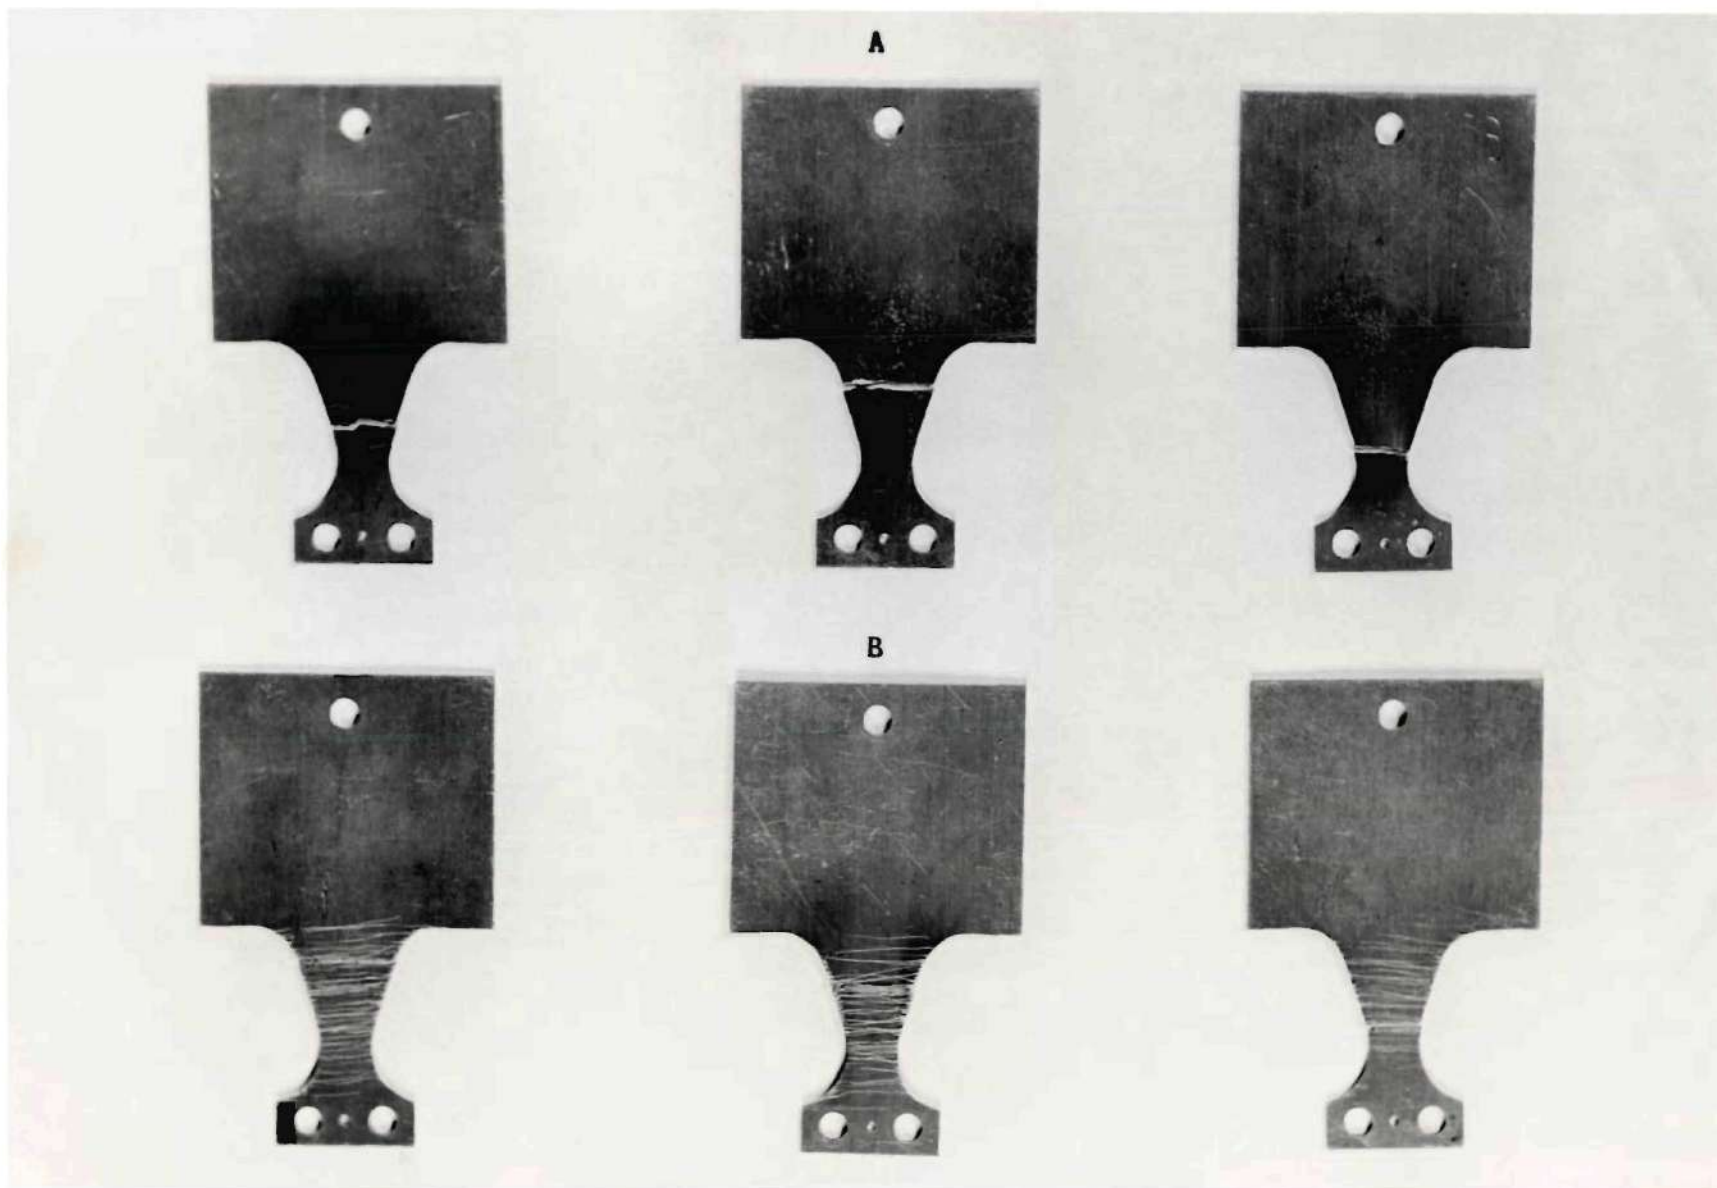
FRACTURED 75S-T6 SPECIMENS SURFACE FINISH: A. POLISHED B. GRIT NO. 60
